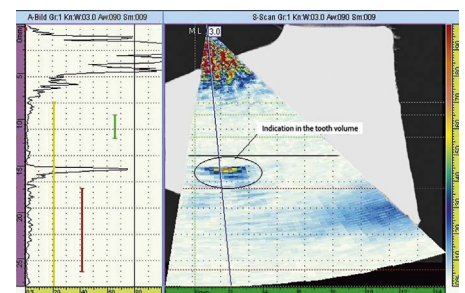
Scan of tooth with indication possibly causing a flank breakage (fig. 5)
